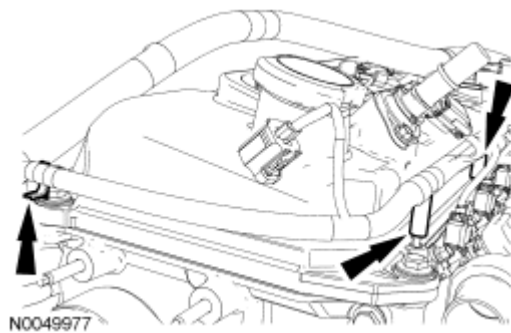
Detaching Wiring Harness Retainers From RH Valve Cover Stud Bolts
